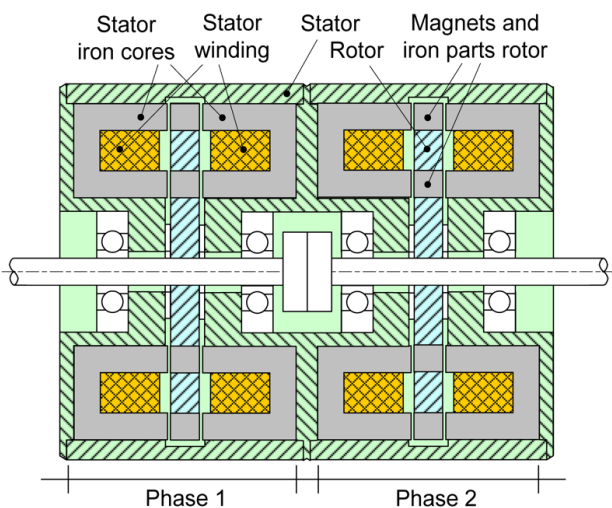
Schematic cross sectional view of a Transversal-Flux-Machine with axial arrangement and double stator
